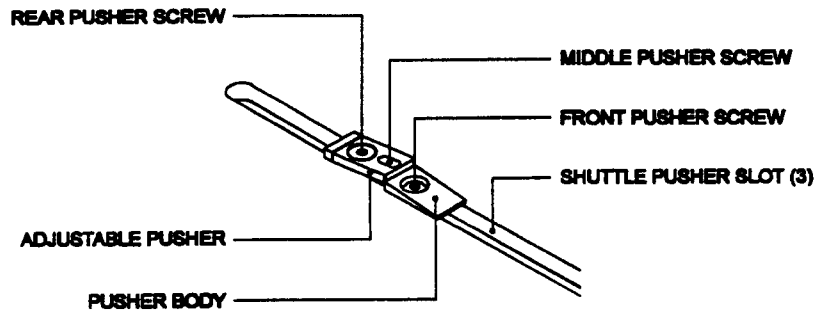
Rear pusher details indicating the location of the various adjustment points.
